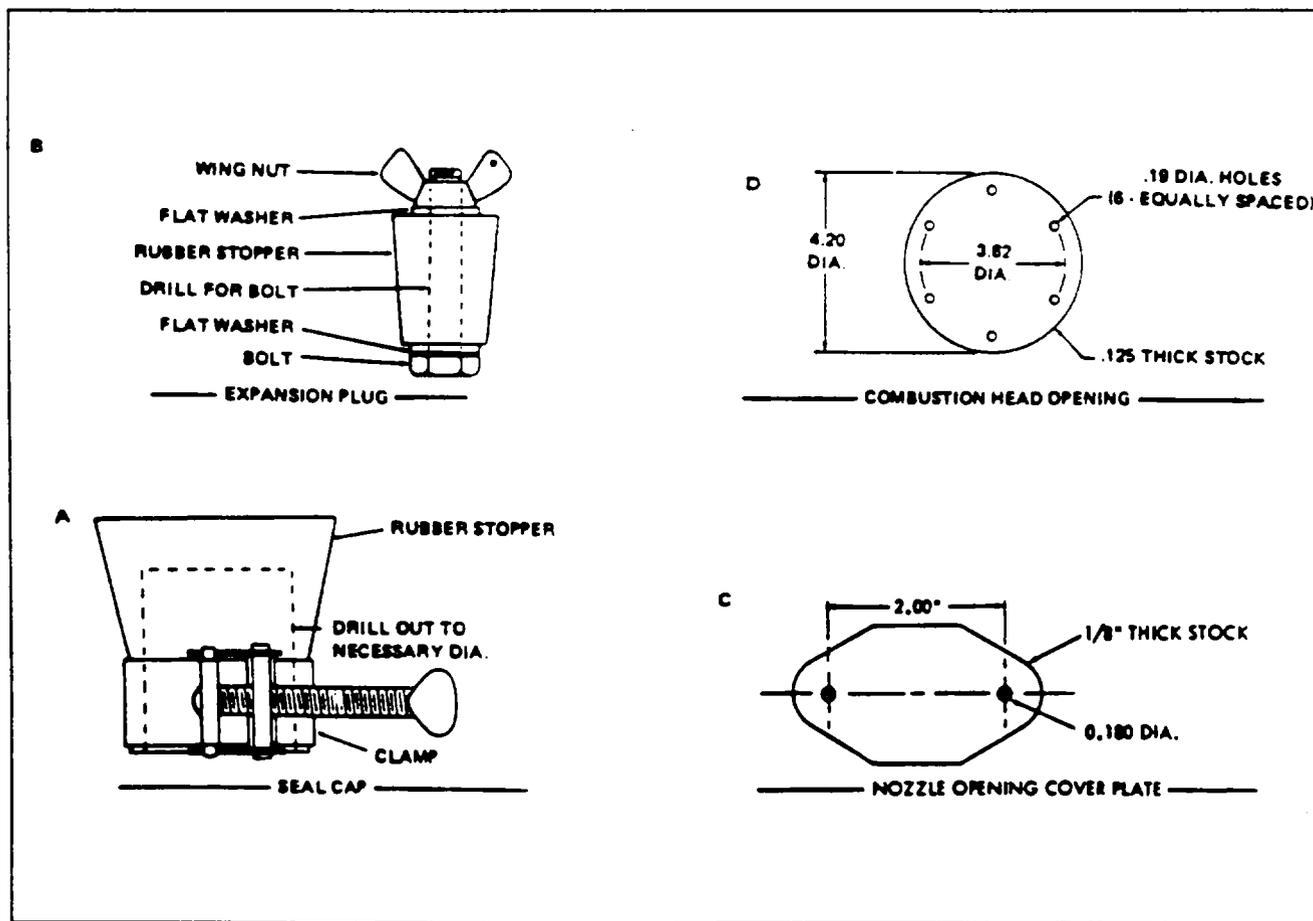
Suggested Design for Seal Plate, Plugs and Caps for Combustion Tube Leakage Test
